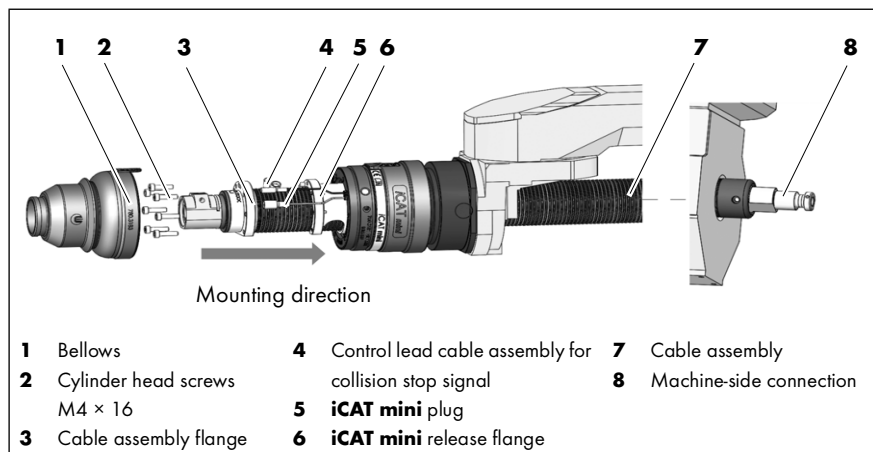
Mounting the cable assembly iCAT mini for ABIROB® G
